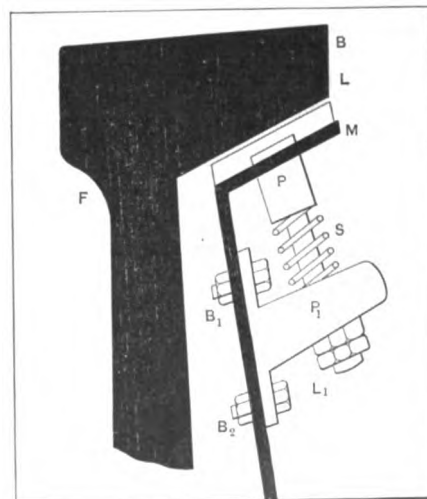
Showing method of inserting springs in clutch to give easy engagement
